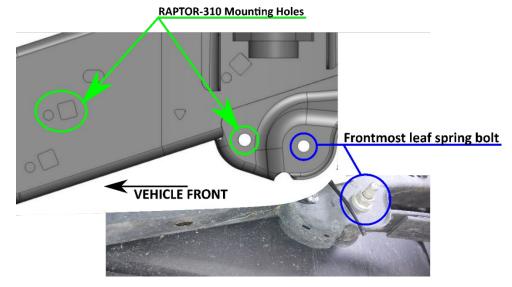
Rear Horn Bracket (RAPTOR-310) Mounting Location
